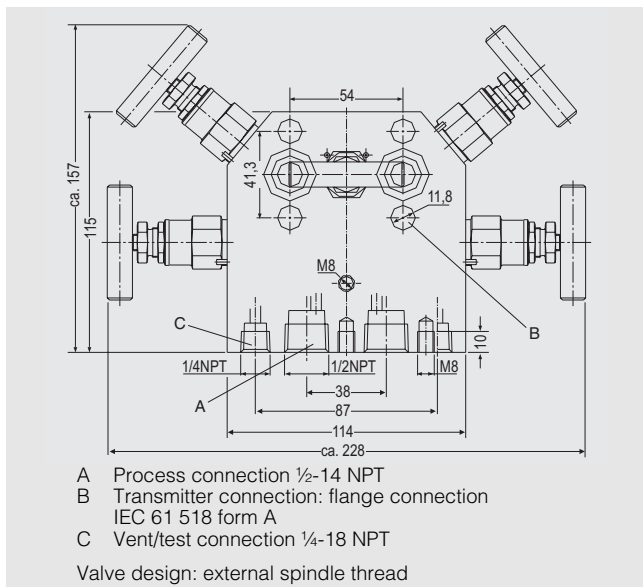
/92 Five-spindle valve manifold DN 5, dimensions
